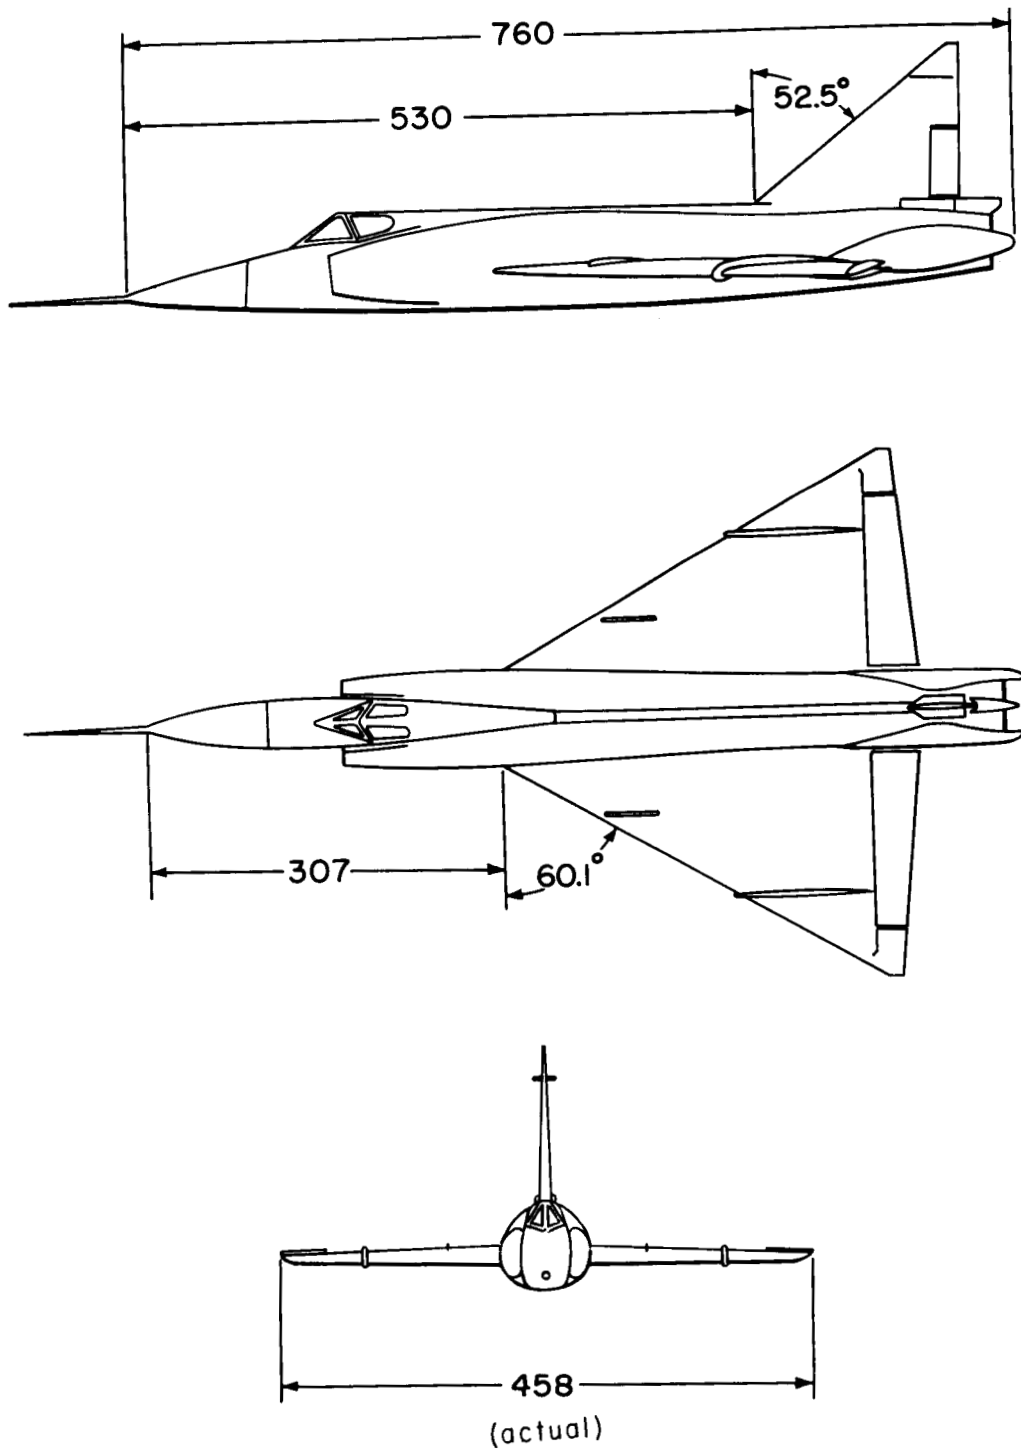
Three-view drawing of test airplane. All dimensions in inches.
